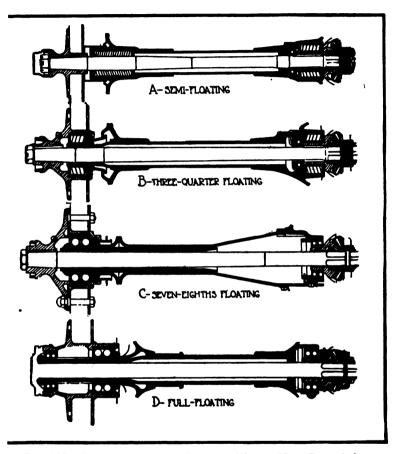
Defining Principal Types of Weston-Mott Rear Axle Construction.
